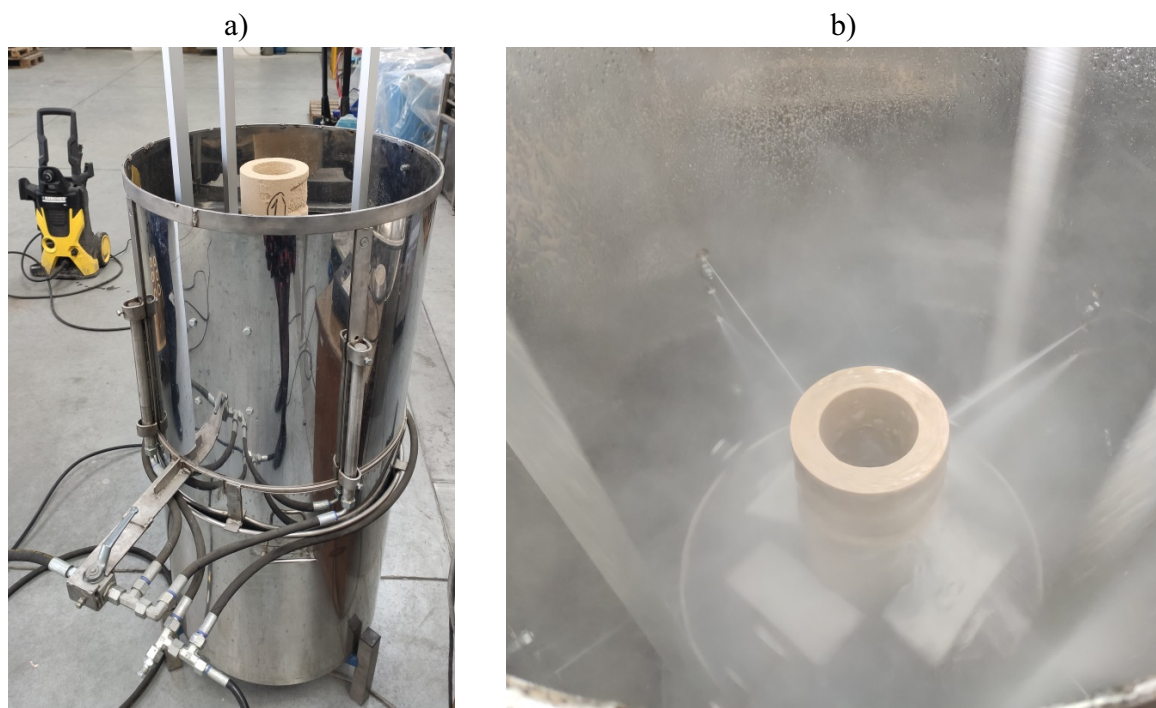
Device for ablative removal of moulding sand and controlled cooling of casting: a) general view, b) erosion tests
